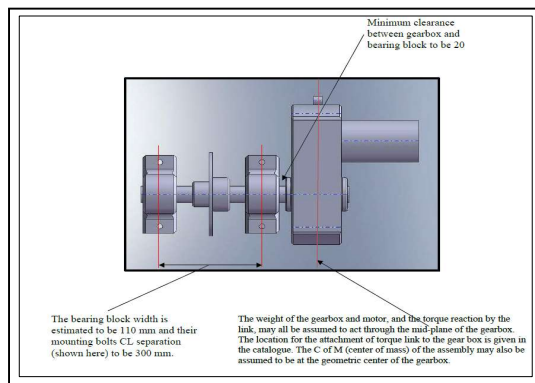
Possible Top-View of Proposed Gear Drive (Annotated)
